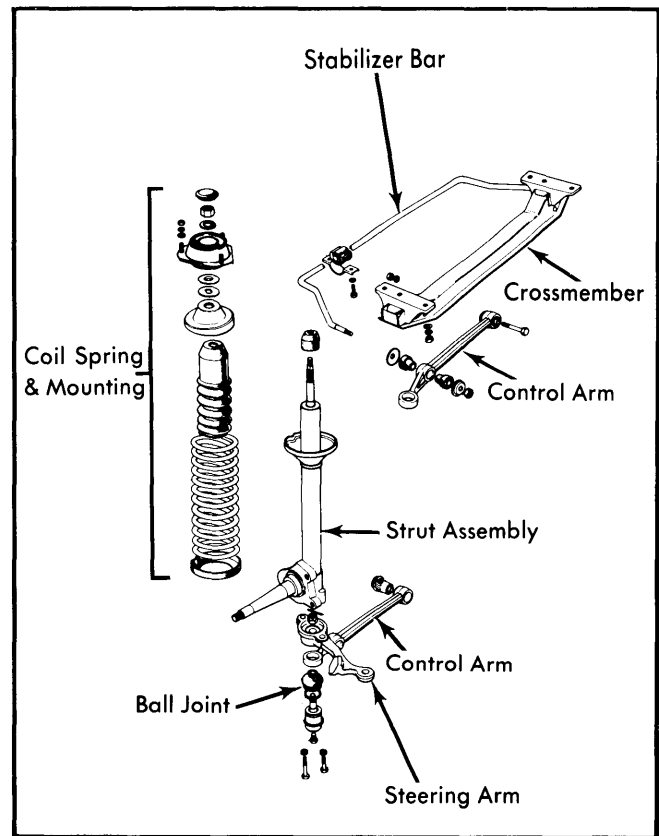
Exploded View of 808 and RX-3SP Front Suspension
